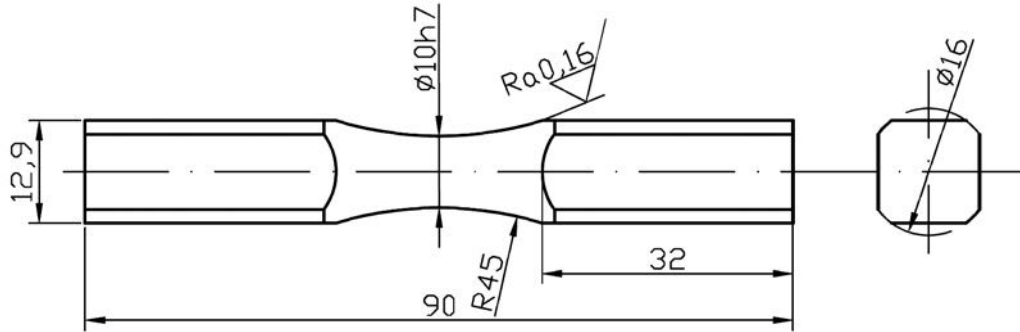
The shape and dimensions of a test piece for fatigue tests
